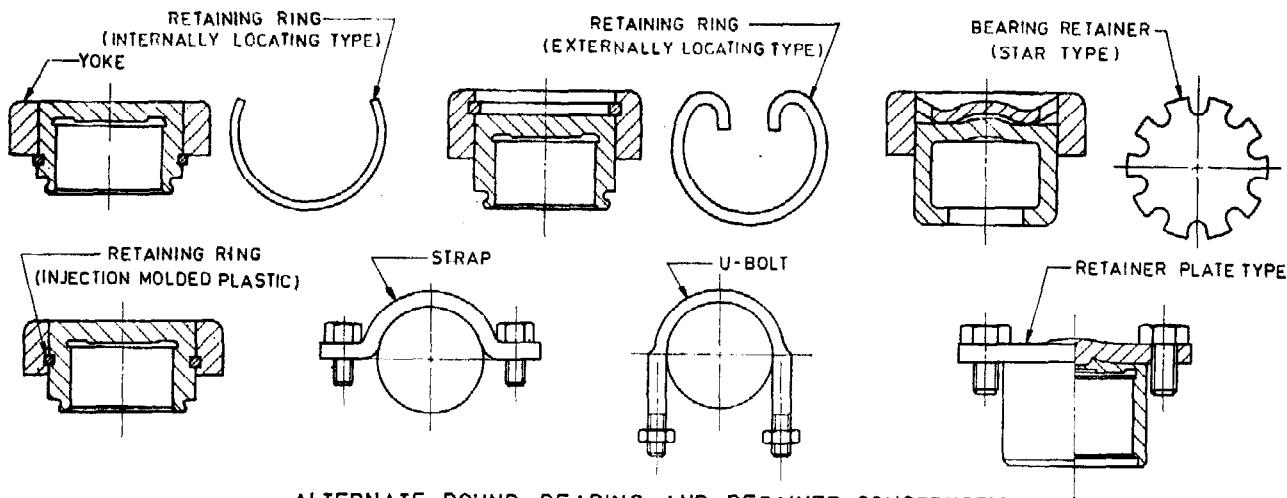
UNIVERSAL JOINT BEARING AND RETAINER TYPE
